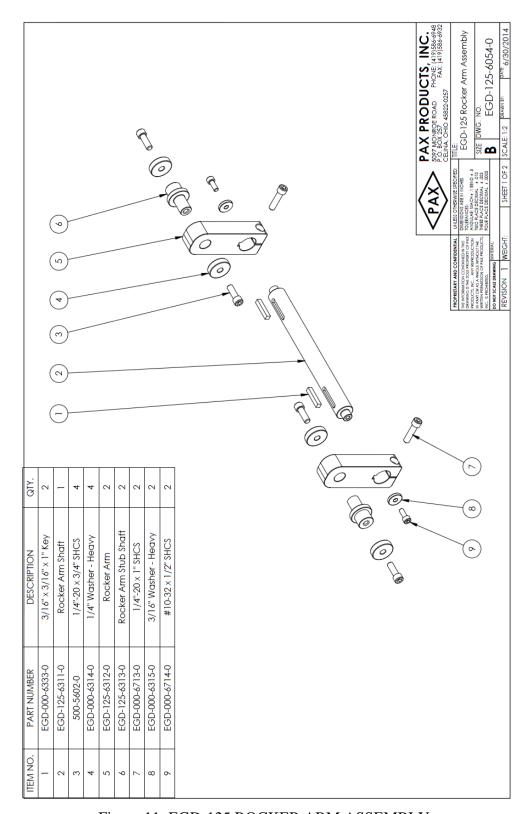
EGD-125 ROCKER ARM ASSEMBLY
